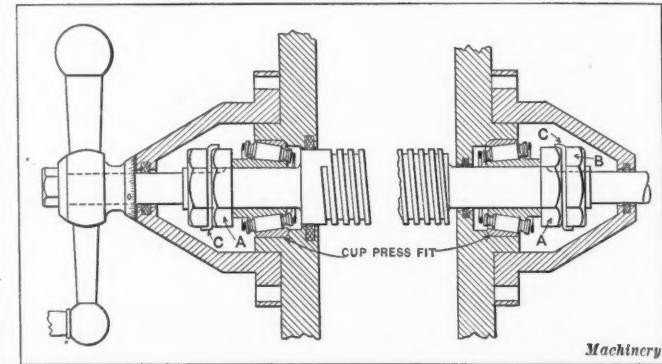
Application of Roller Bearings on Table Feed-screw of Hand Milling Machine
